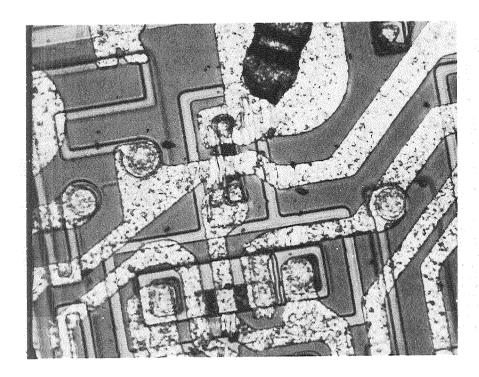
Surface Photo of Type MIC 938 Failure Device Showing Tool Damage and Smeared Metallization
